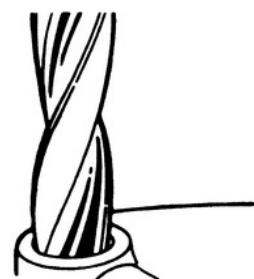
Using the kit, tap the hole in order to receive the thread insert. Keep the tap well oiled and back it out frequently to avoid clogging the threads
